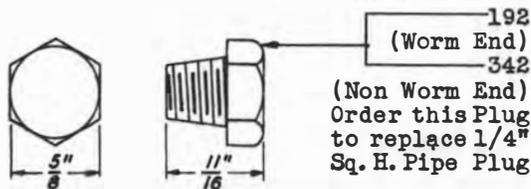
Drain Plug - Hex. H. Pipe Plug
